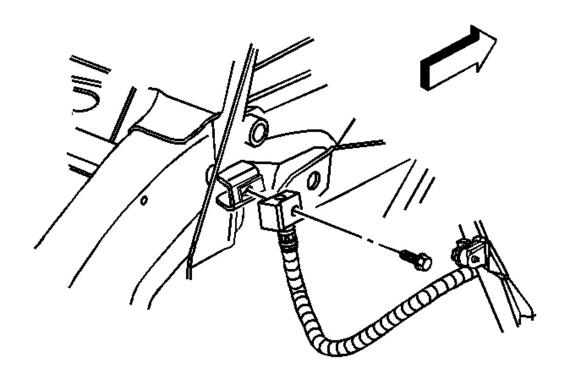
Brake Hose Retaining Bolt Removed From Frame Courtesy of GENERAL MOTORS CORP.
